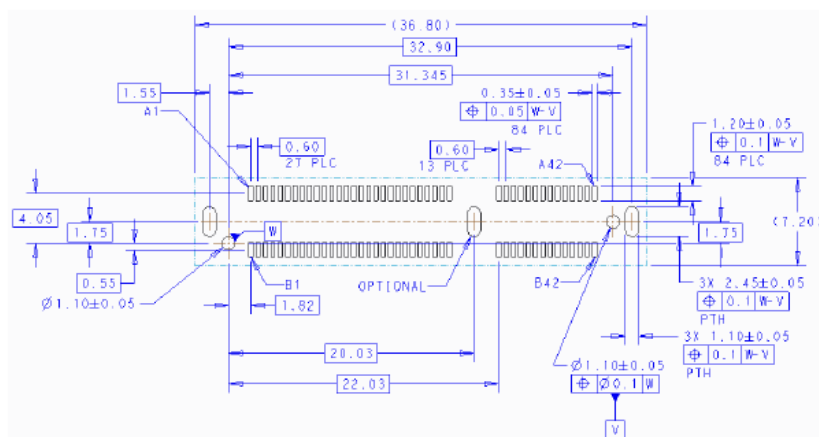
PCB Layout for GenZ VT 2C Unshielded
